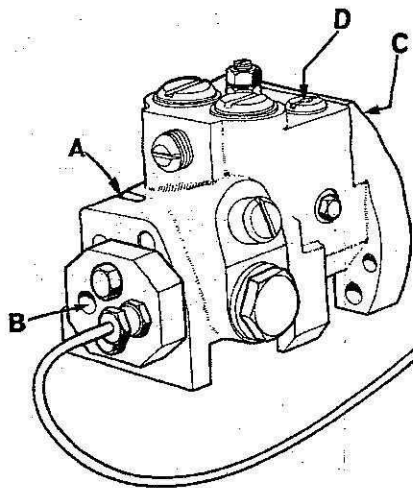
View showing adapter connecting pressure line to control valve assembly. Very slight leakage from valve openings is normal. If excessive leakage shows at any of the openings (A, B, C or D), refer to text for location of faulty valve.
